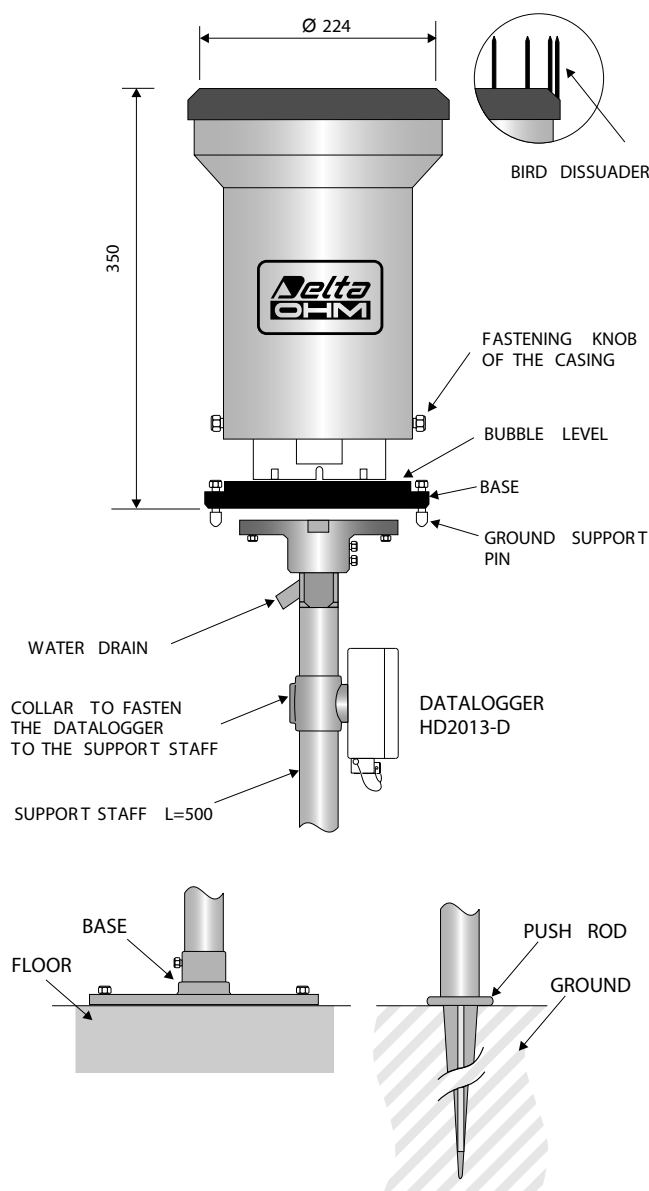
Mechanical dimensions, and floor or ground fastening system
